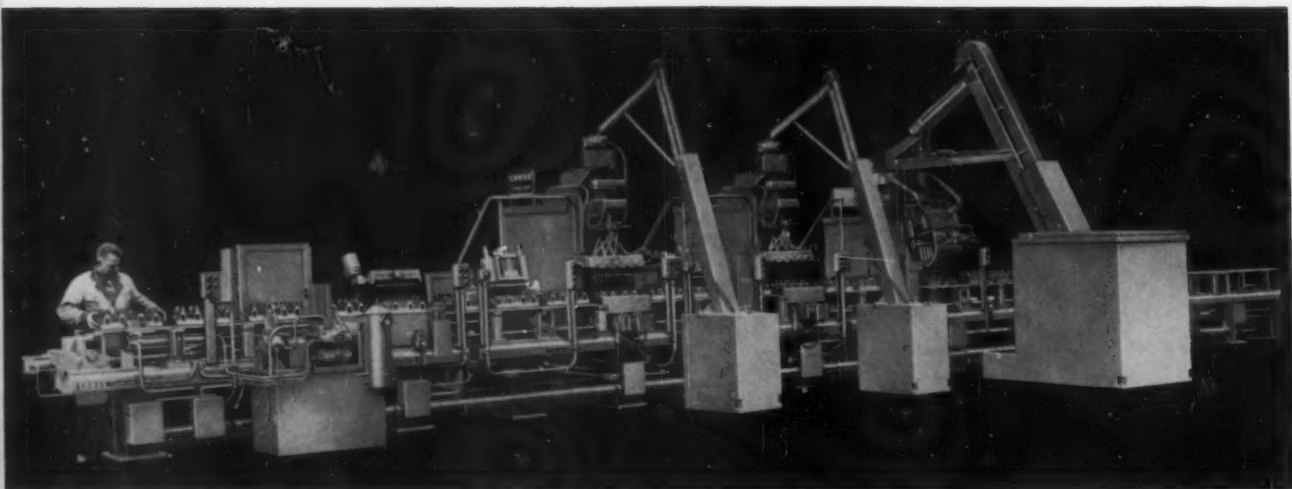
Assembling machine for V-8 cylinder heads introduced by The Cross Co.
